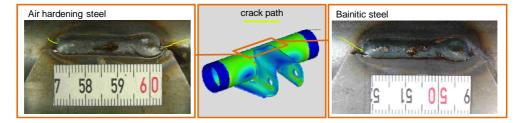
Fracture patterns of air hardening steel and bainitic steel after fatigue tests using component type specimens (upper weld seam); joining technology MAG-welding
